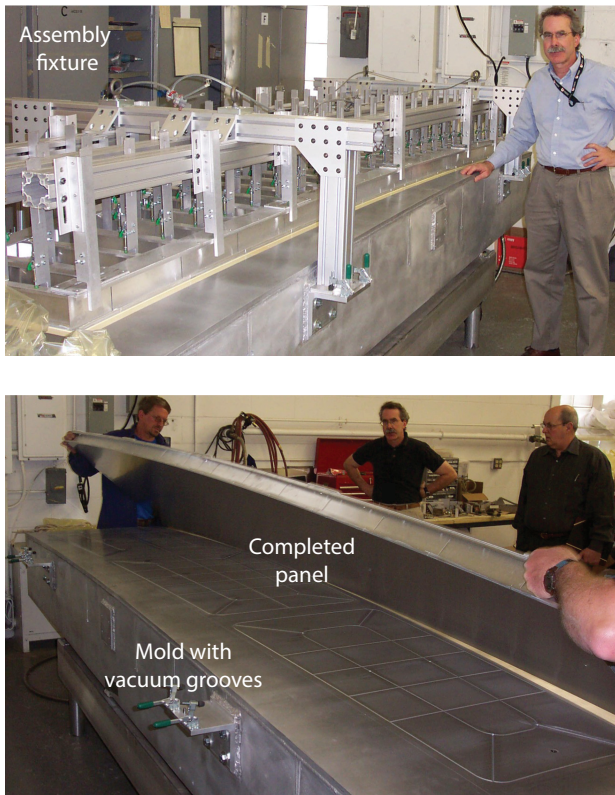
The shape of a panel is set by placing a sheet of aluminum onto a mold and applying a vacuum to ensure intimate contact. A grid of ribs is epoxied to the back of the sheet and the assembly is left to cure for 24 hours. After curing, the assembly fixture is removed, the vacuum pump is turned off, and the completed panel is removed.
